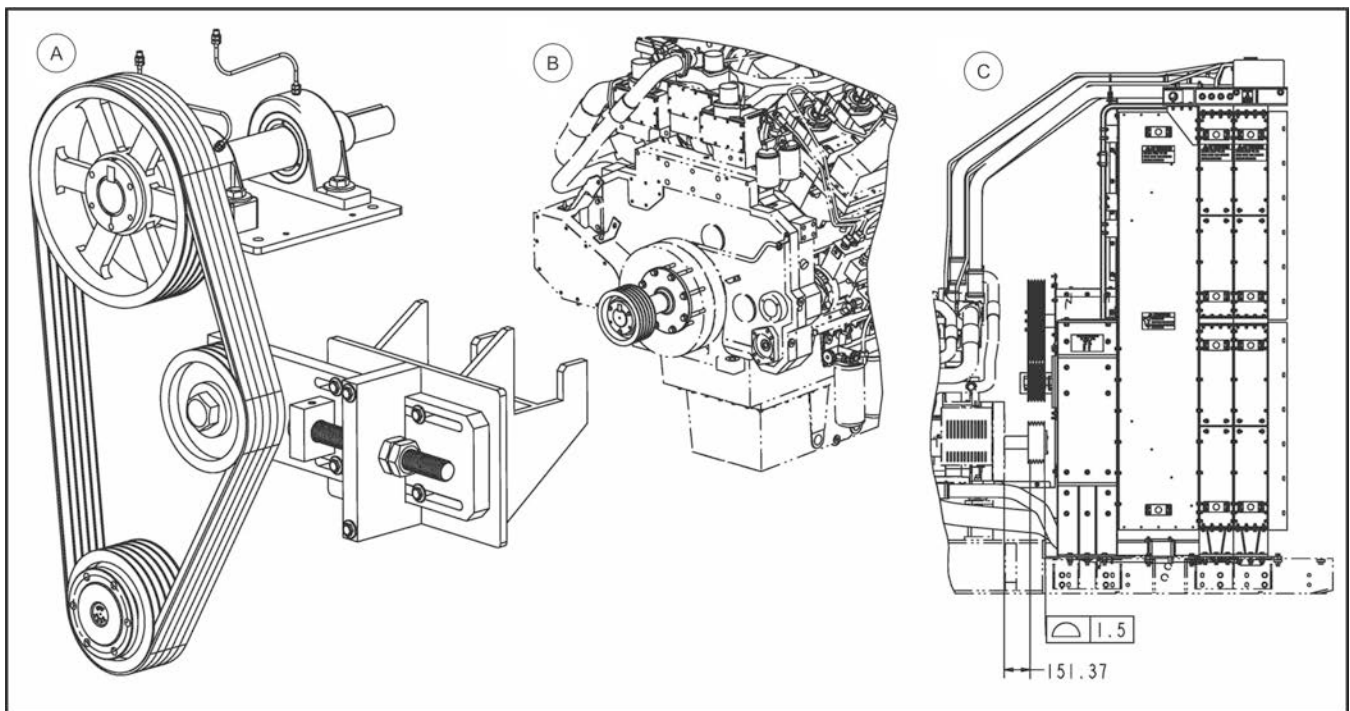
FAN DRIVE INSTALLATION ON 43°C RADIATOR ASSEMBLY
